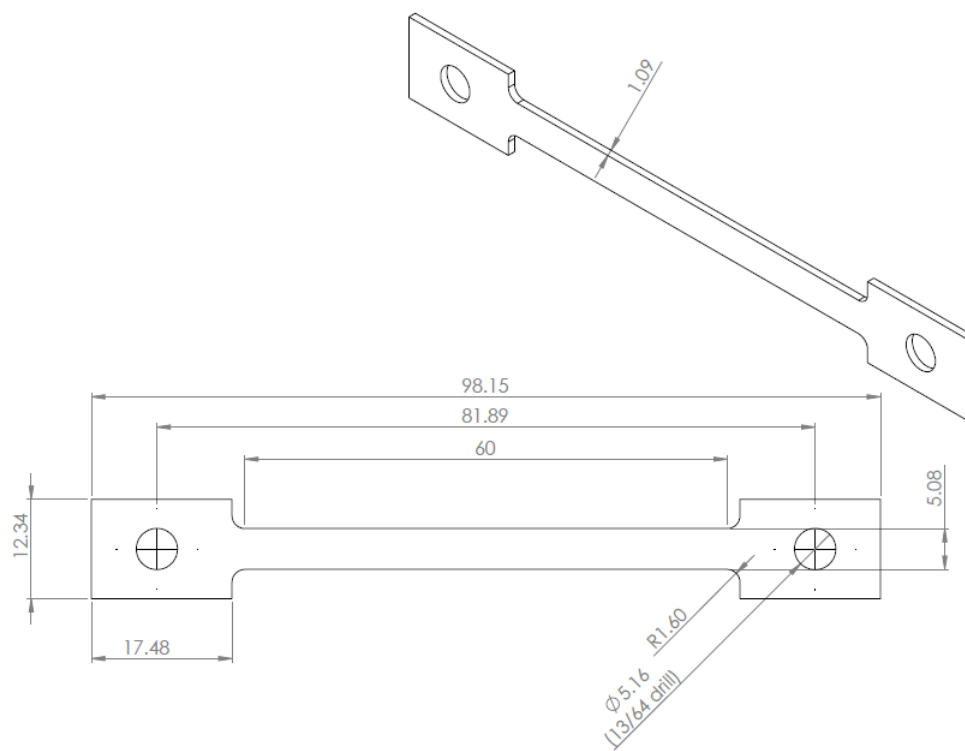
Engineering drawing for miniature tensile specimen (standard).
